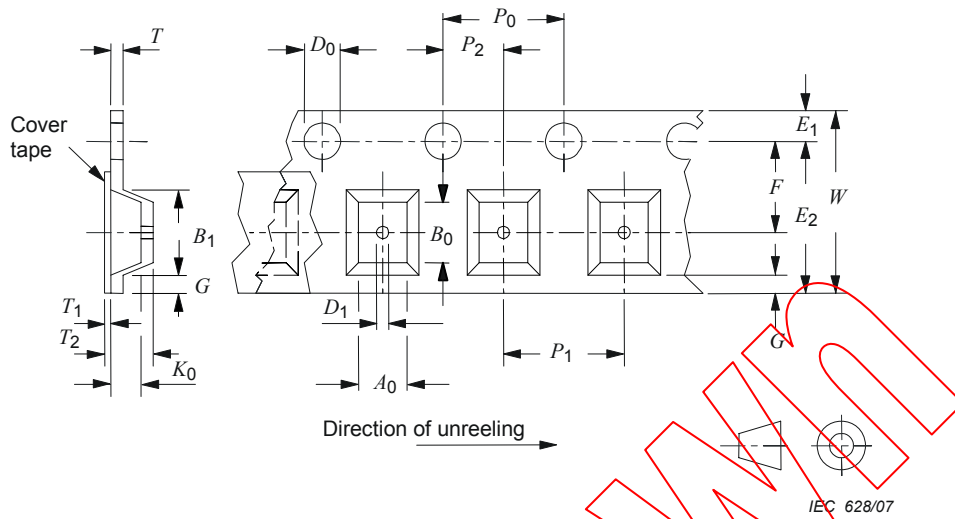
Blister carrier tape dimensions (8 mm, 12 mm, 16 mm and 24 mm)
